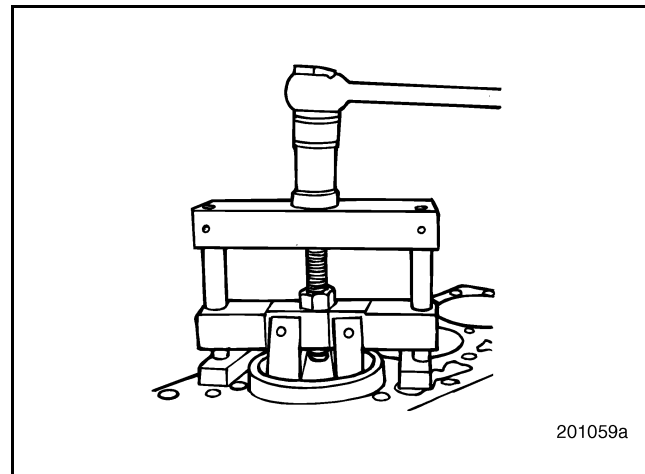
Cylinder Liner/Sleeve Puller PT6435
